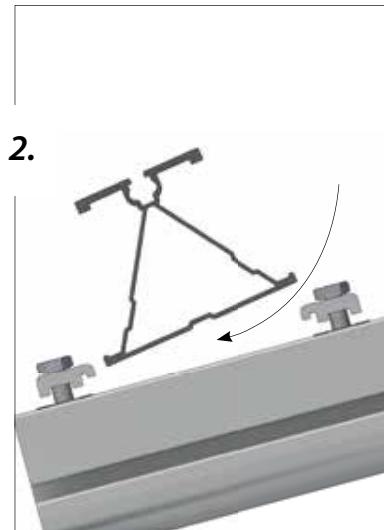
3 (swiveling in the module-bearing rail)
